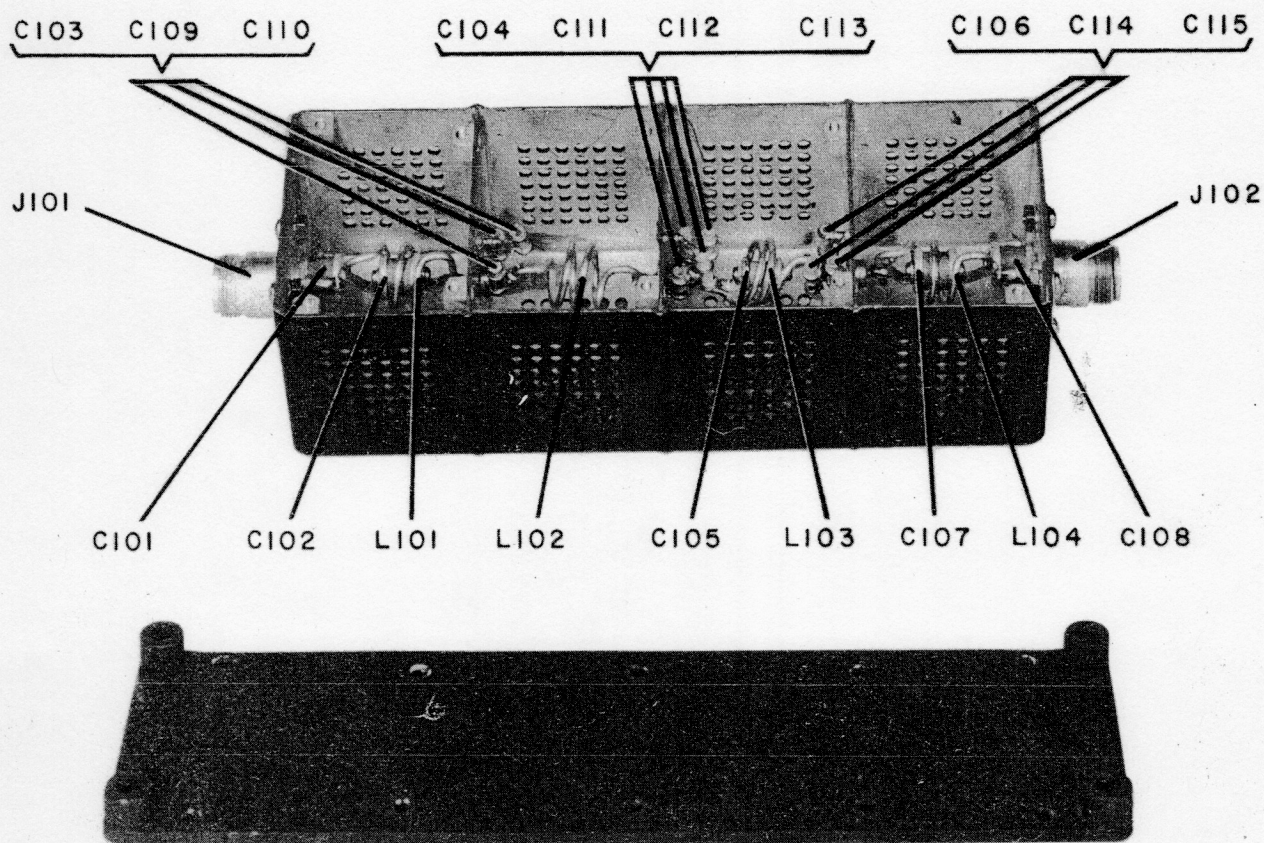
A. Type 35D-2 Low Pass Filter, Cover Removed
